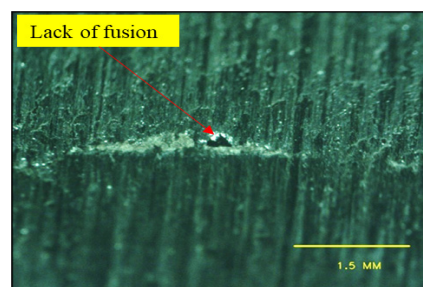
Discontinuity in fillet weld between pad plate to shell layer - 20X
